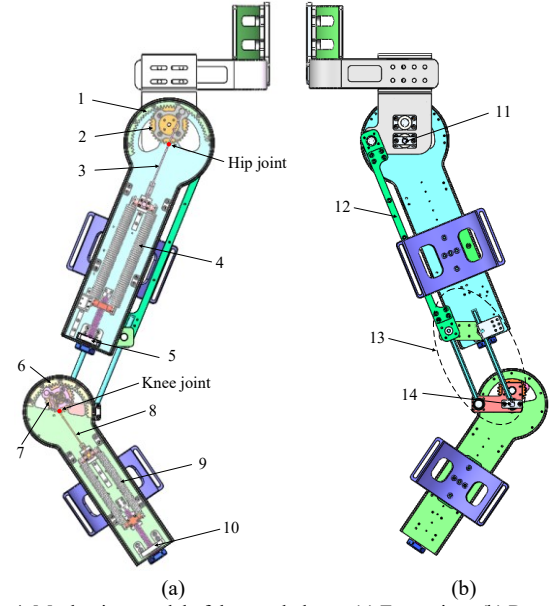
Mechanism model of the exoskeleton. (a) Front view. (b) Rear view. 1-Gear 1, 2-Pinion 1, 3-Wire rope 1, 4-Tension spring 1, 5-Adjusting mechanism 1, 6-Gear 2, 7-Pinion 2, 8-Wire rope 2, 9-Tension spring 2, 10-Adjusting mechanism 2, 11-Encoder sensor 1, 12-Auxiliary link, 13-Length adjusting mechanism, 14-Encoder sensor 2.
